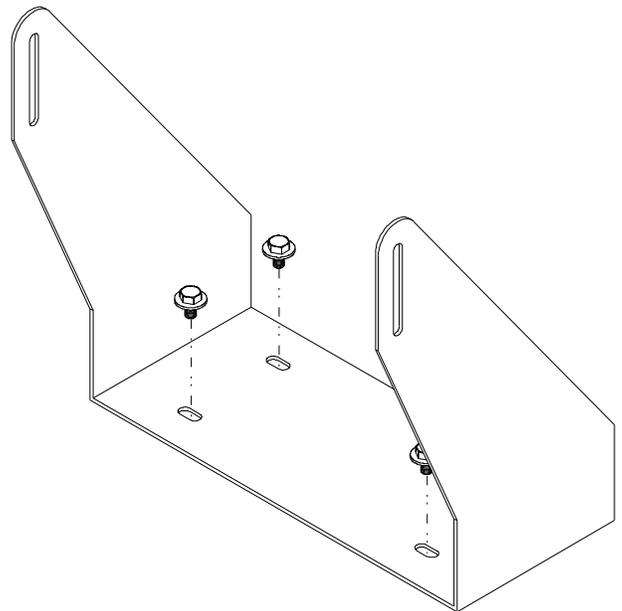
INSTALLING THE SWIVEL MOUNT TO A HORIZONTAL SURFACE
